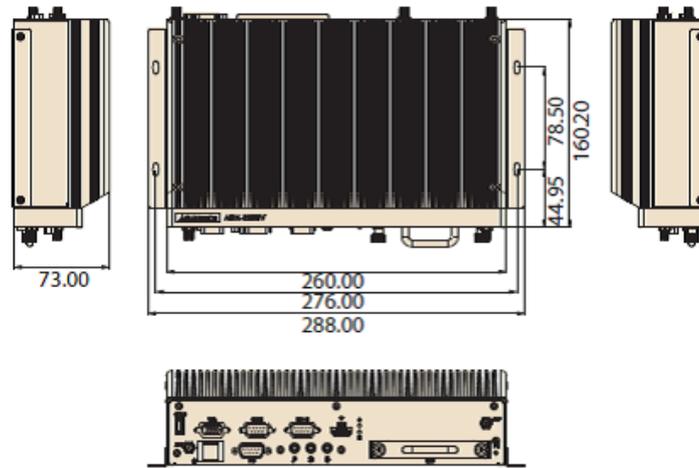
ARK-2250V/S Mechanical Dimensions
